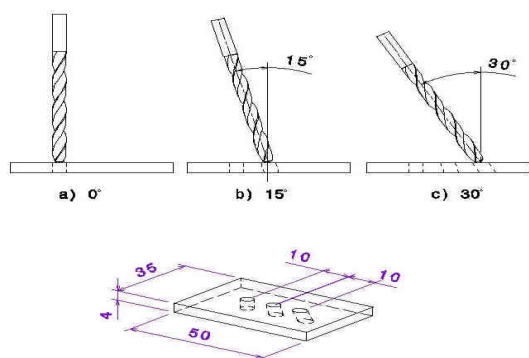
Bone work-pieces with its drilling cutting angle (0° , 15° , and 30°).
